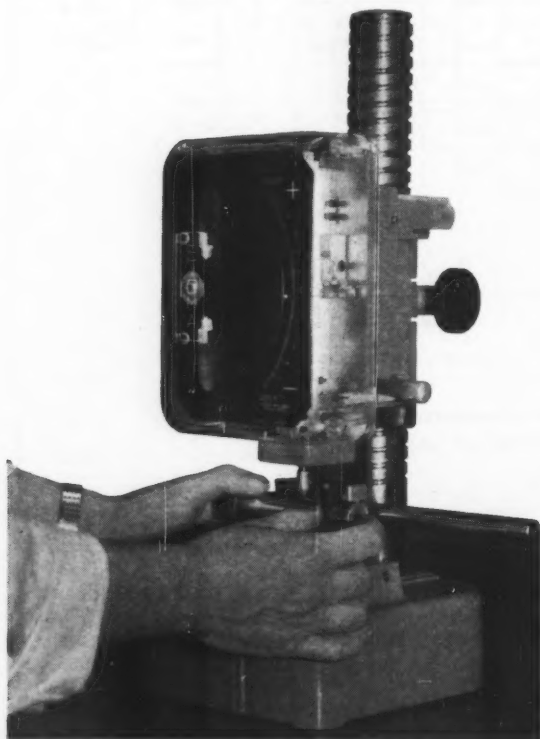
Measuring instrument fitted with back-stop used to inspect parts whose manufacture is described in the Paper.
